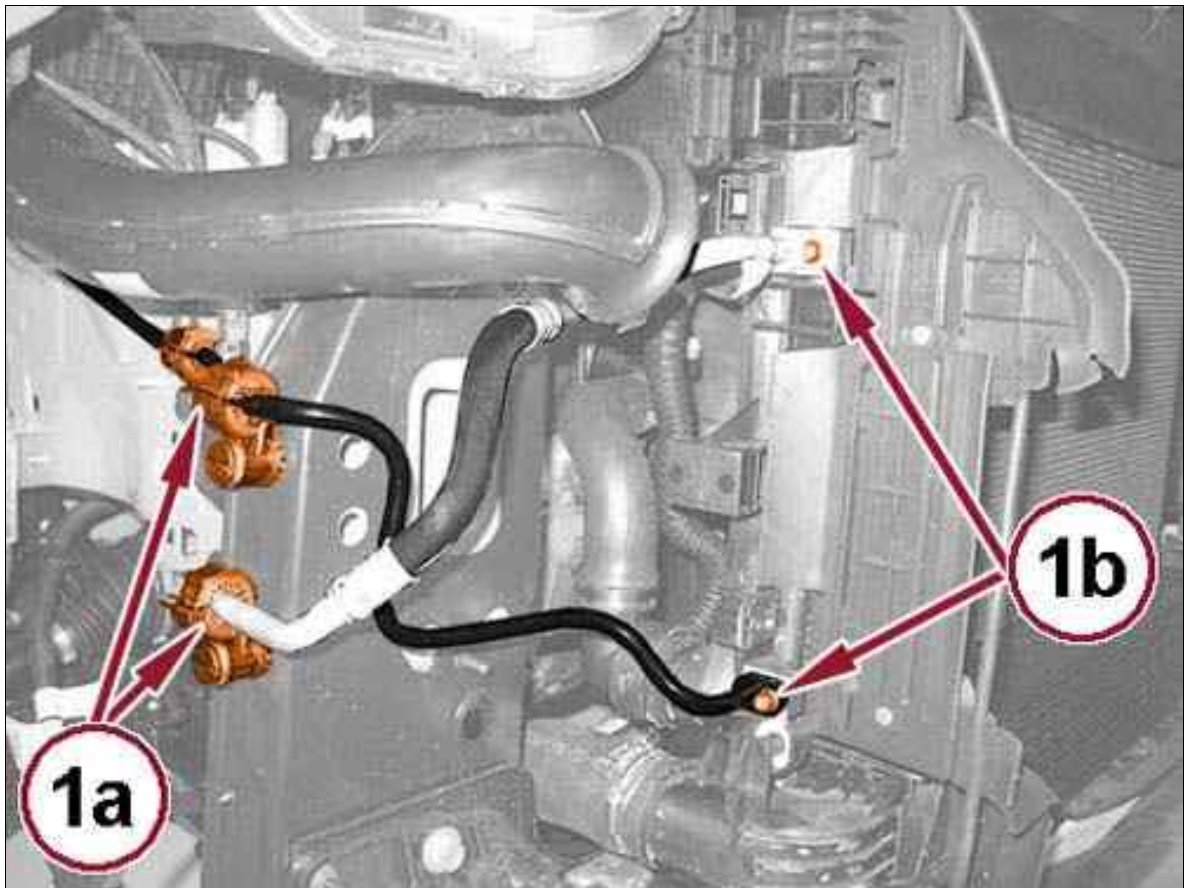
Lower Radiator Hose Clip & CAC Hose Clamp
